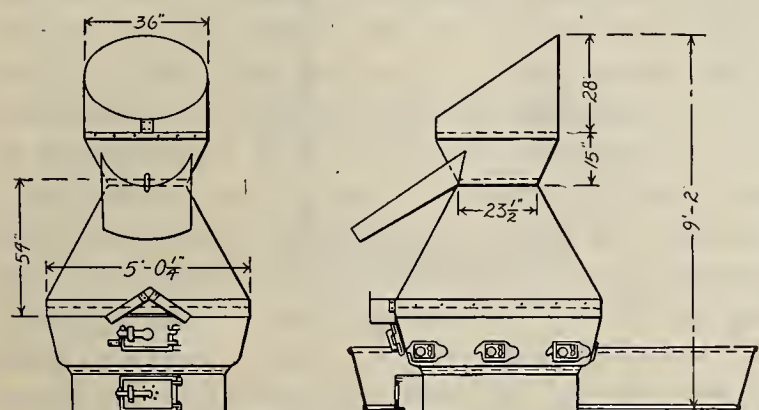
L. S. & M. S.—SAND VALVE IN TOWER.
